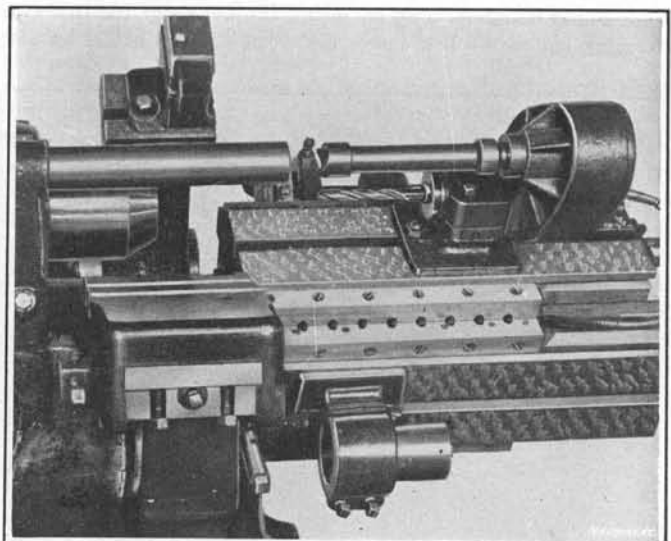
High-speed Drilling Attachment used on Gridley Automatic Turret Lathe
